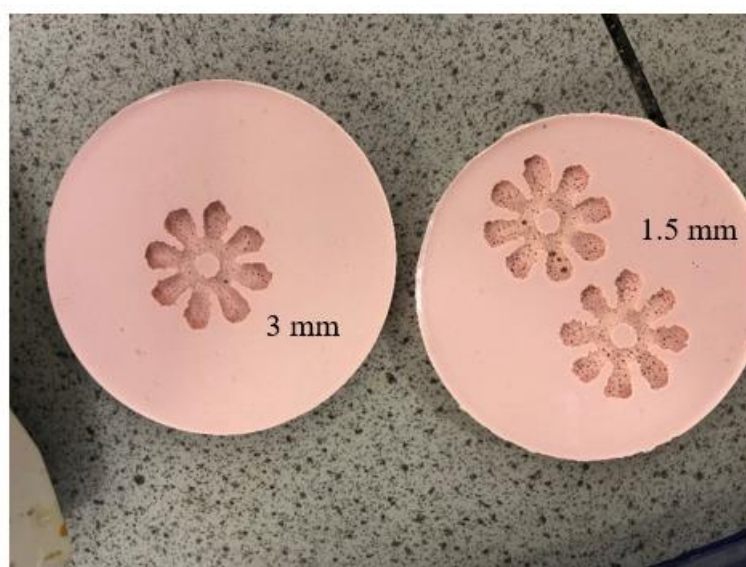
The 1.5 mm and 3 mm flower shaped silicone mould.
